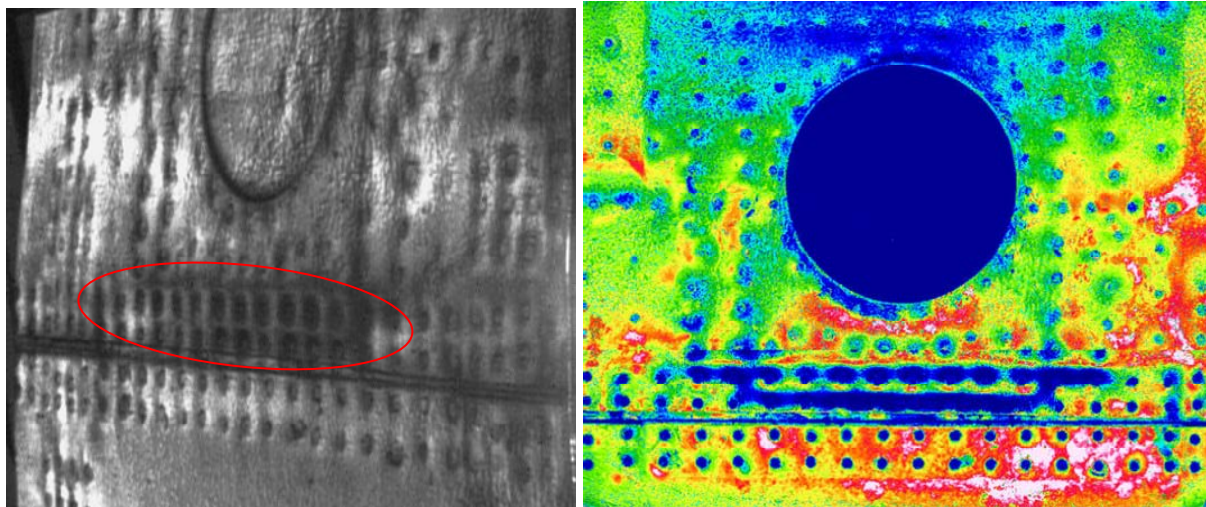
Laboratory Inspections Preceding Teardown Both DAIS (left) and UT (right) Indicated Damage in the Upper Skin of the Butt Joint.
